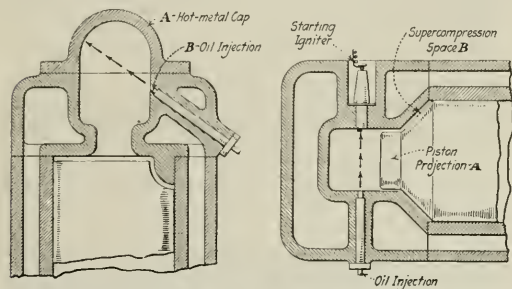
HORNSBY TYPE OF COMBUSTION CHAMBER
